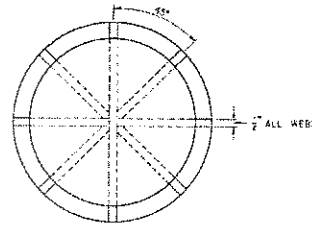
Rigid Bearing Plate for 12 in. Diameter Test
